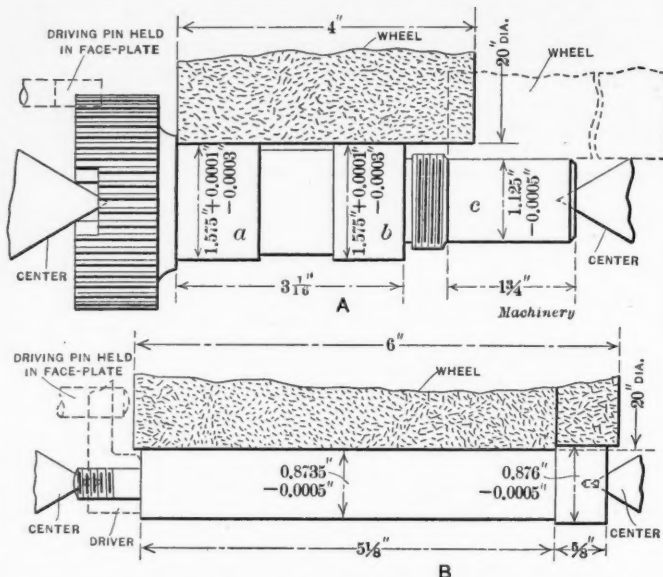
Examples of grinding Idler Gear and Main Drive Gear Shaft by Form Wheel Method
